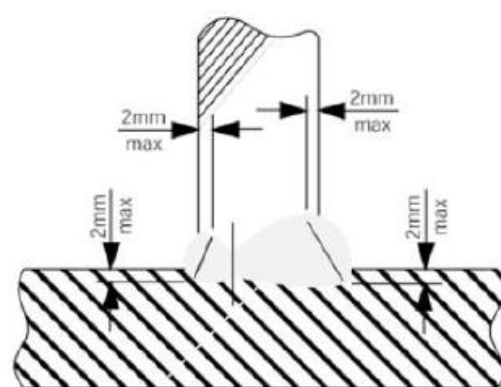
Example showing the position of the indentations for hardness test in the weld metal, the heat affected zone and the base metal of a fillet weld (dimensions in mm)
